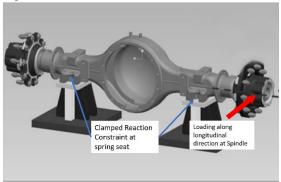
Test Setup for Longitudinal Spindle Loading Test
